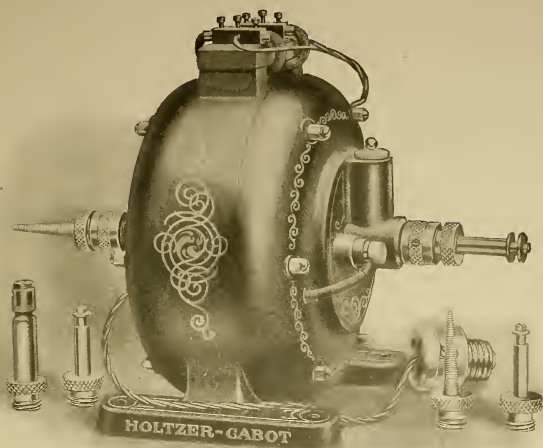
A MOTOR-DRIVEN JEWELERS' LATHE, MADE BY THE HOLTZER-CABOT ELECTRIC CO., BOSTON, MASS.
